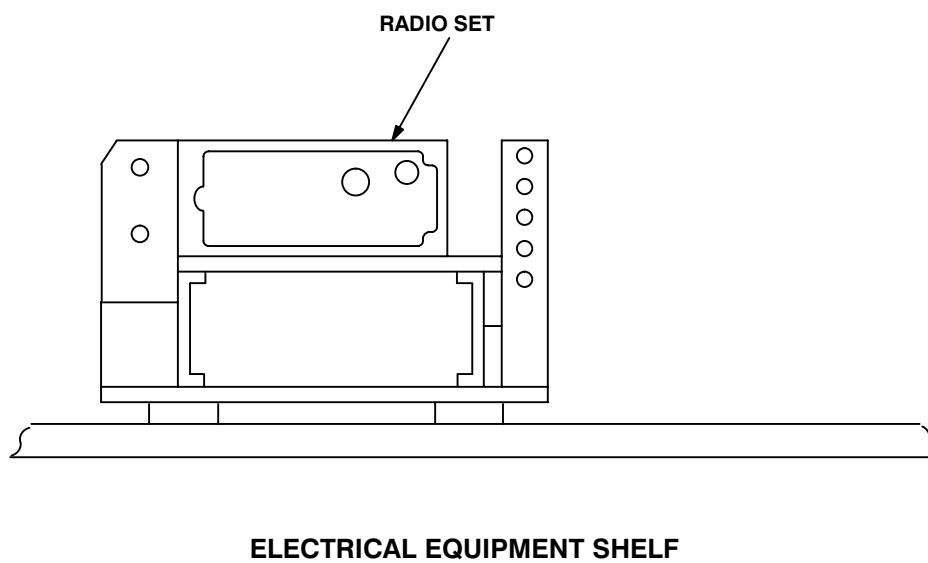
(2). MK and Radio Installation: Radio Equipment Locations
